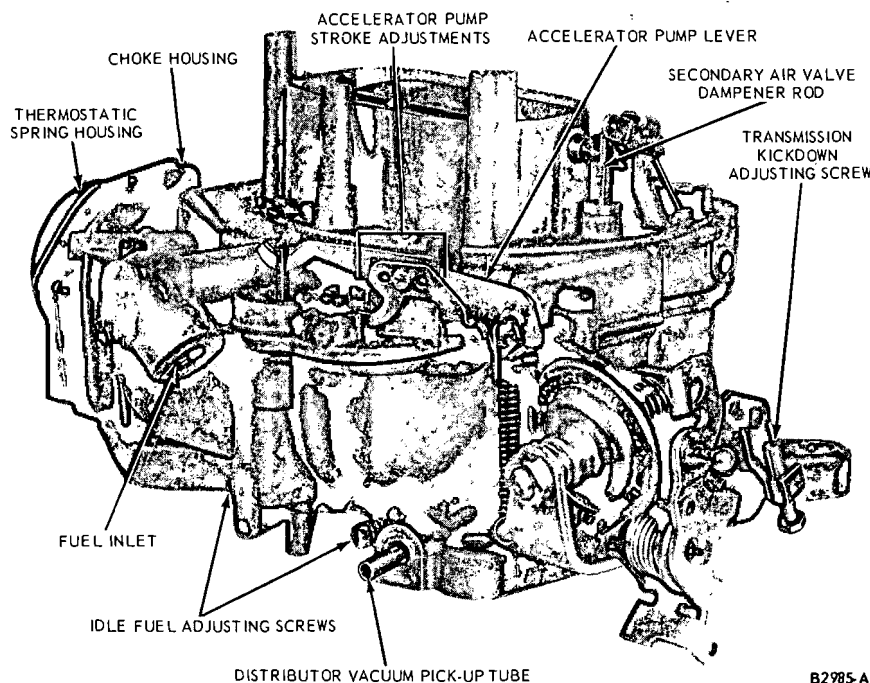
Autolite Model 4300 4-V Carburetor—Left Front 3/4 View
